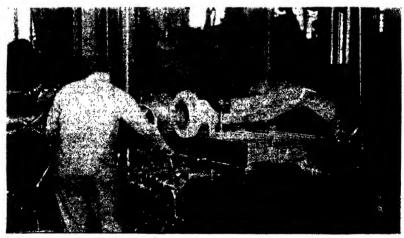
Milling the flanges of crooked locomotive steam pipes.
